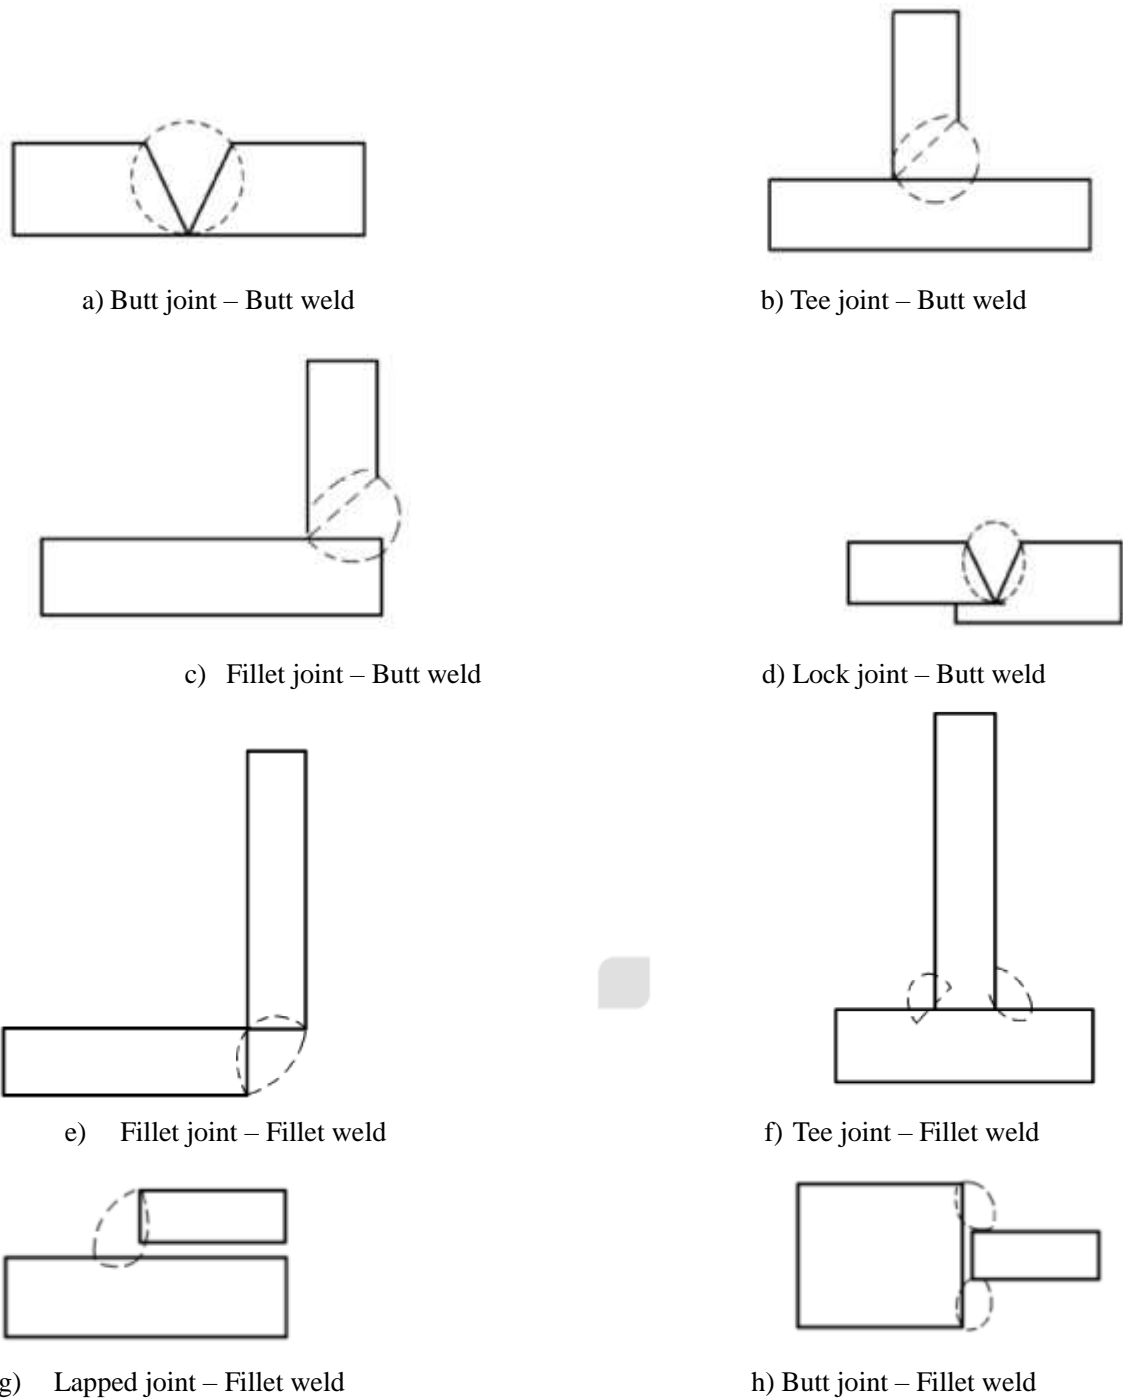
Butt welds, fillet welds and form of welded joints
